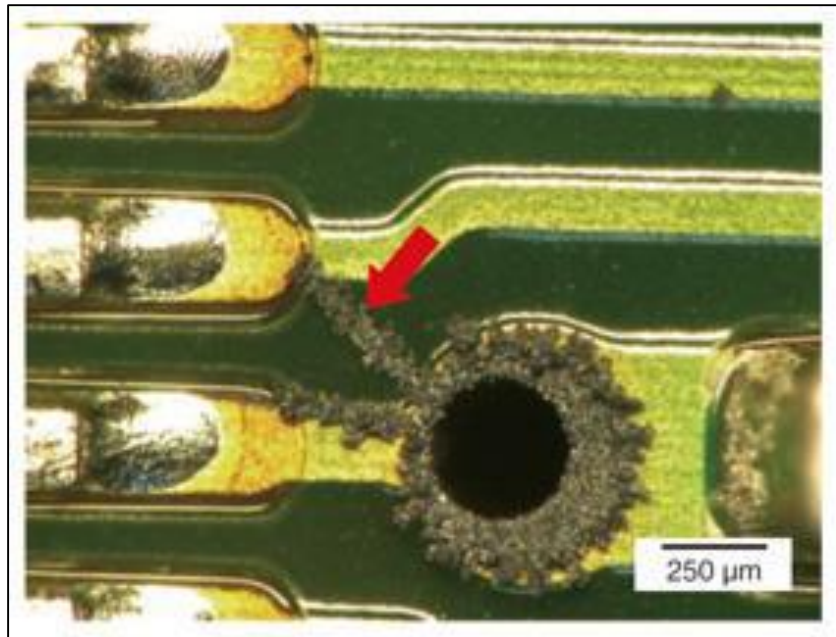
Short in adjacent solder hole and bus line as a result of surface deposition
